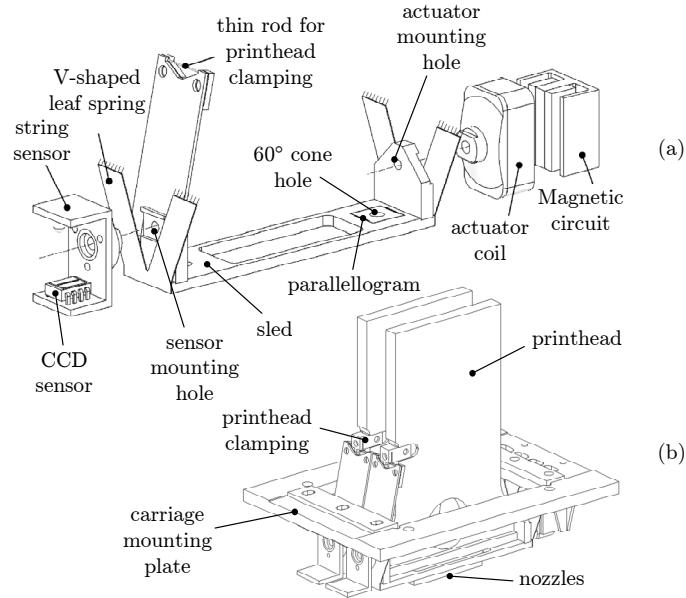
(a): An exploded view of the alignment mechanism. (b): assembly of the alignment mechanism.
